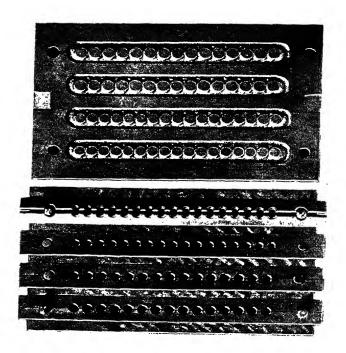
Hand mold producing undercut parts of spool shape. Molded with axis vertical, parts may be removed after lifting the split bars from lower die plate.
